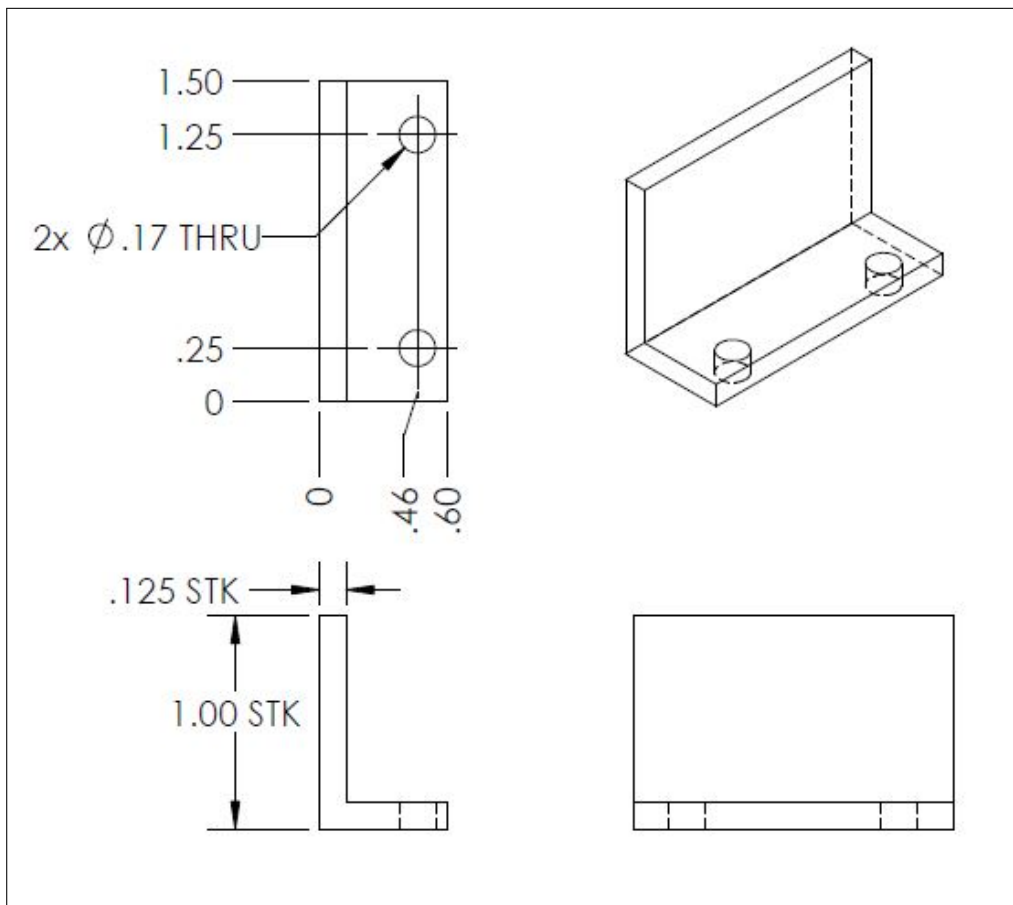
Mobile Base - Front Mounting Foot Detail. Material: Aluminum. UNLESS OTHERWISE SPECIFIED, ALL DIMENSIONS ARE IN INCHES.
